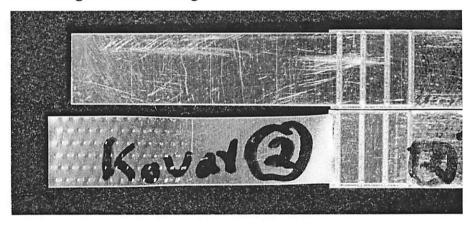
(top) Close-up of an untested "4-line" laser welded specimen (left – Kovar sheet and right – Inconel 718 substrate); and (bottom) after a tensile lap shear test showing Kovar elongation and necking.
